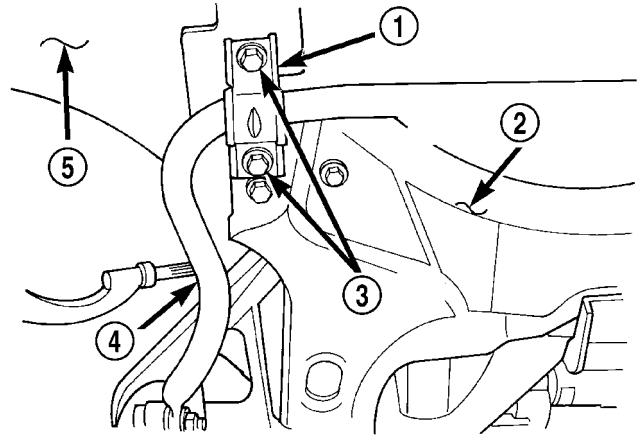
Stabilizer Bar Attaching Link Nut Removal
